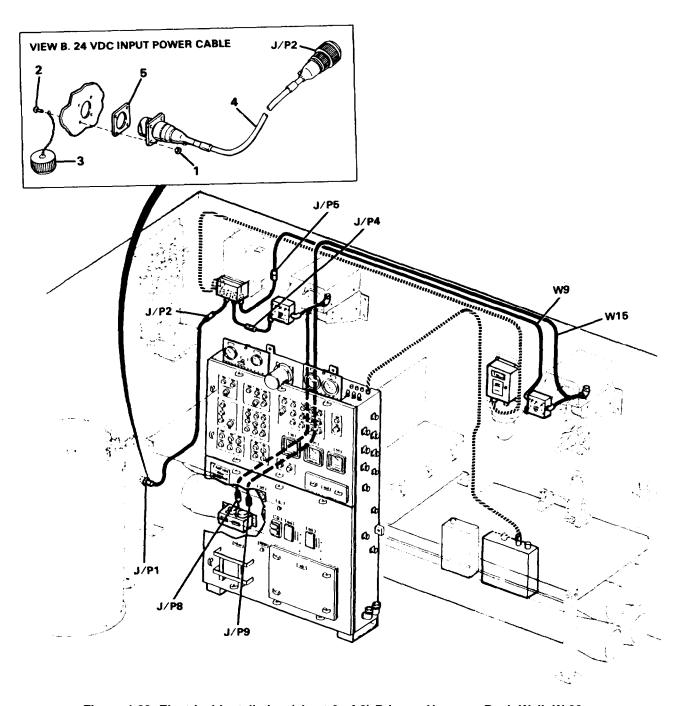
Electrical Installation (sheet 3 of 8) Primary Harness, Back Wall, W-33
